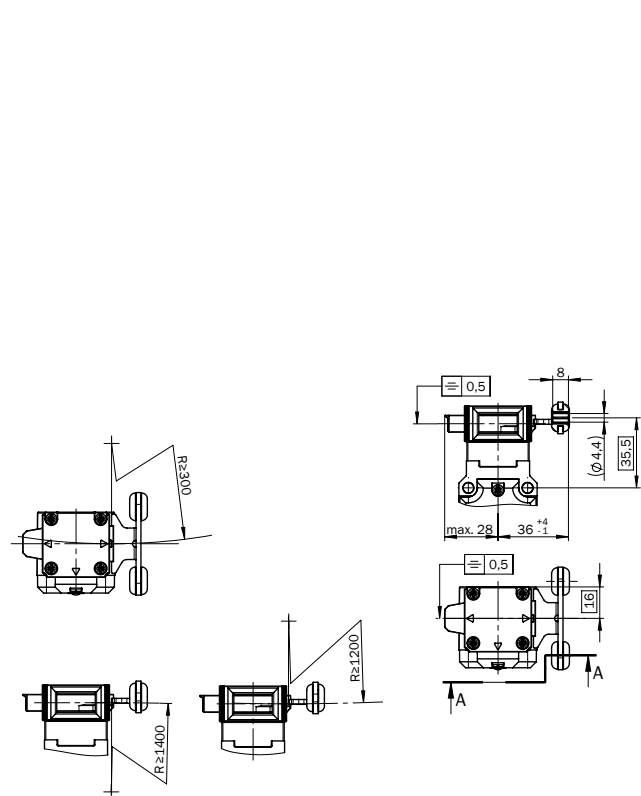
Min. door radii for TR110-XABT angled actuator (mm)
